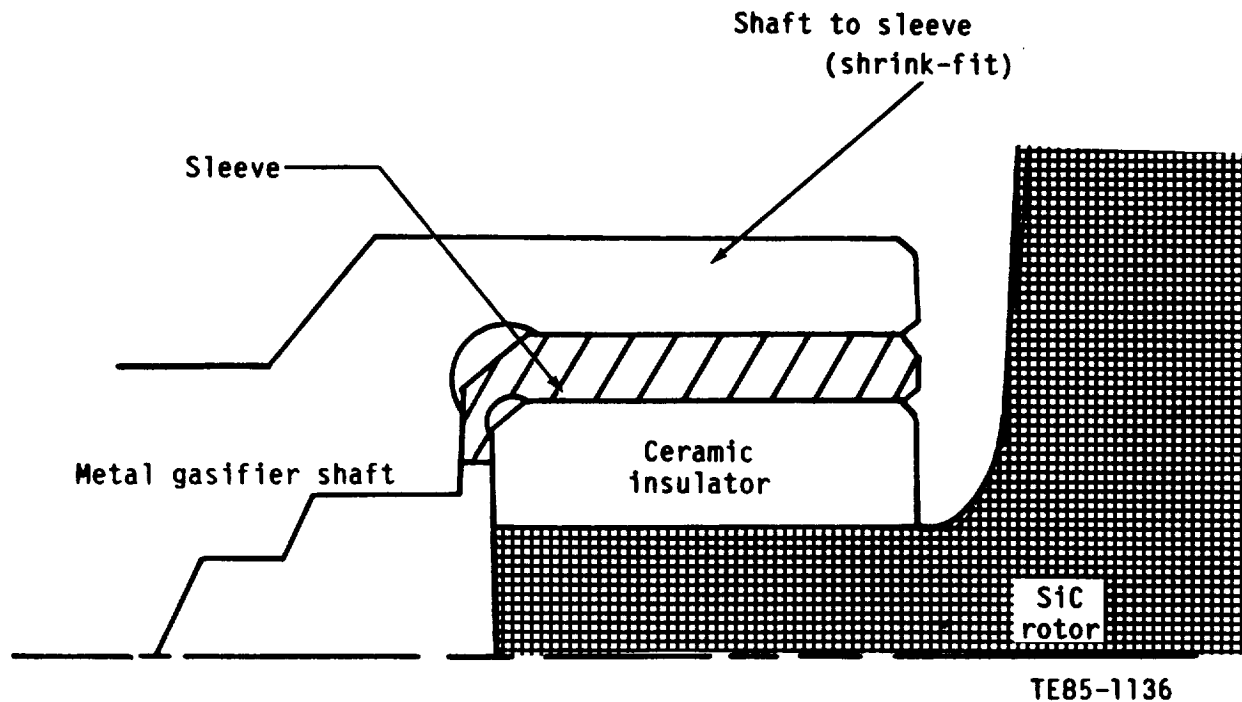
Schematic of ceramic rotor-to-metal shaft attachment system.
